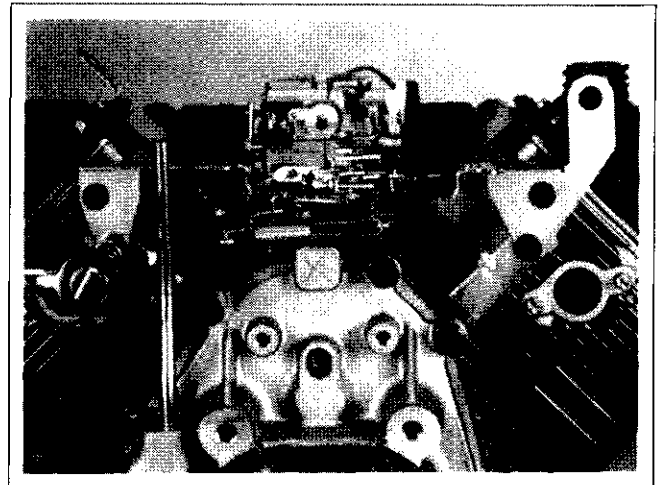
Remove Fuel Pump and Lines as an Assembly.
